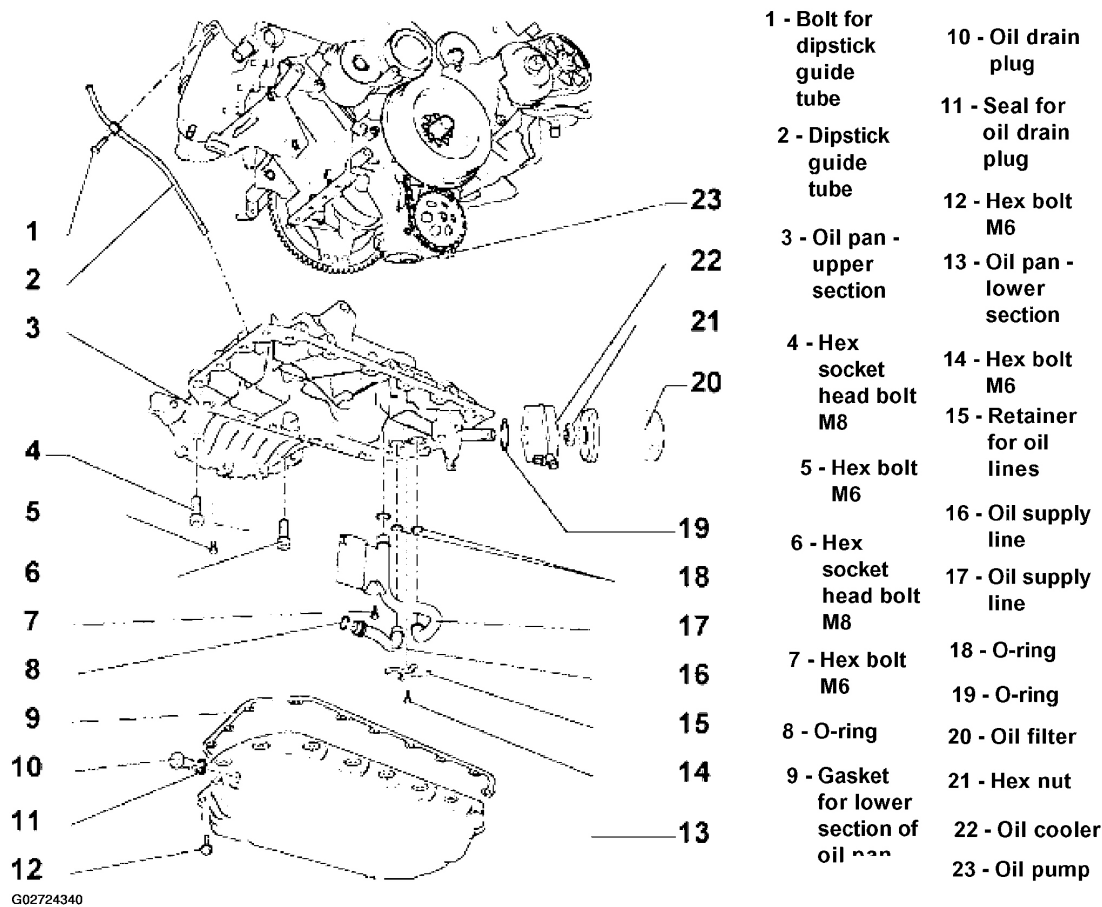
Exploded View Of Oil Pans And Oil Cooler
